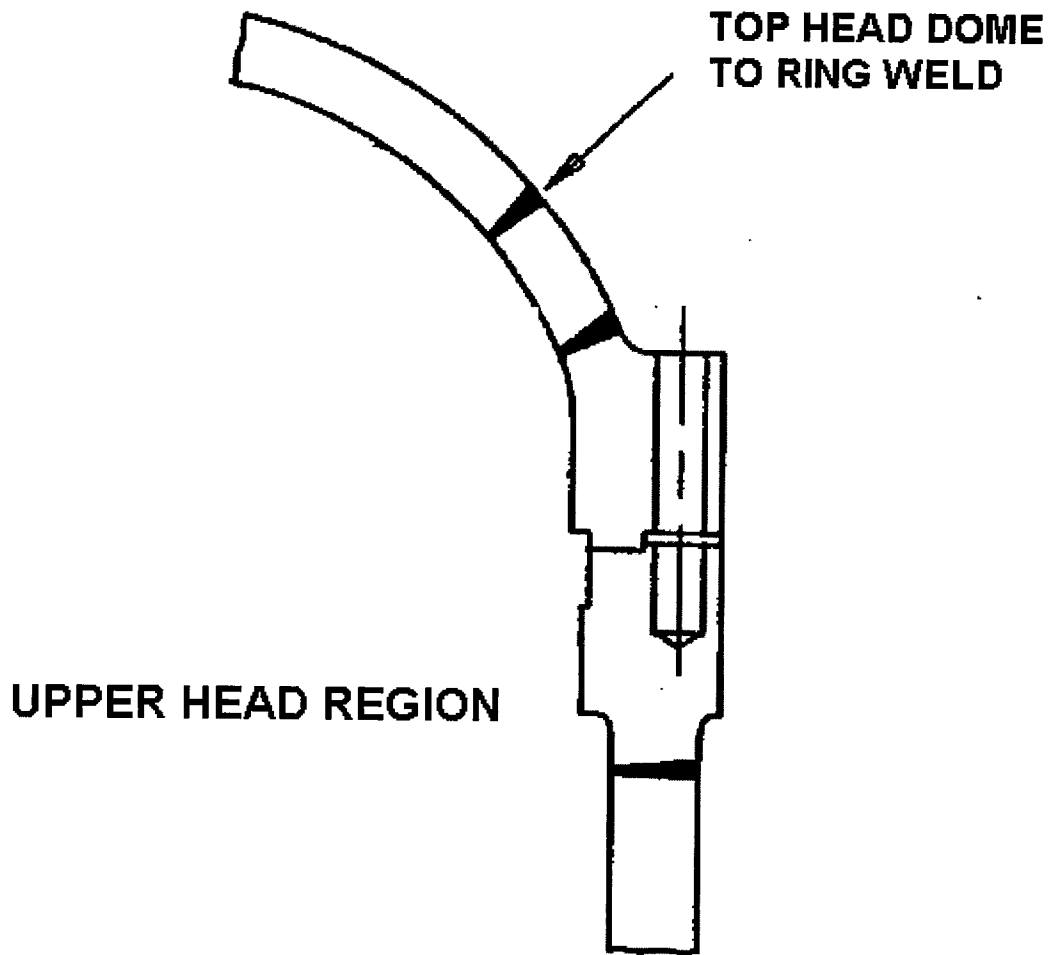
Reactor Vessel Head Dome to Ring Weld Location
